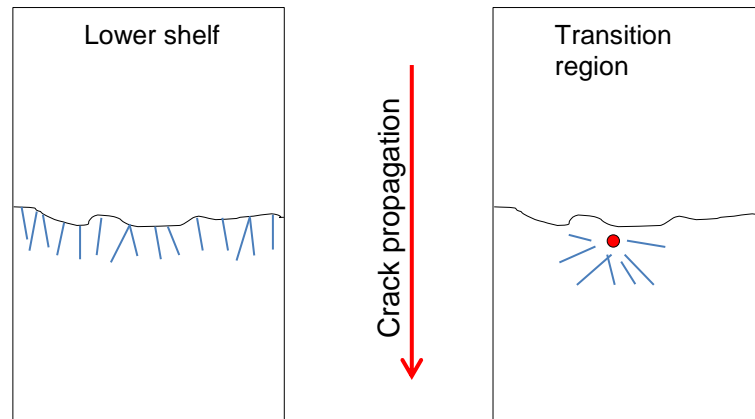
Drawing of typical cleavage fracture surfaces for components containing a crack
